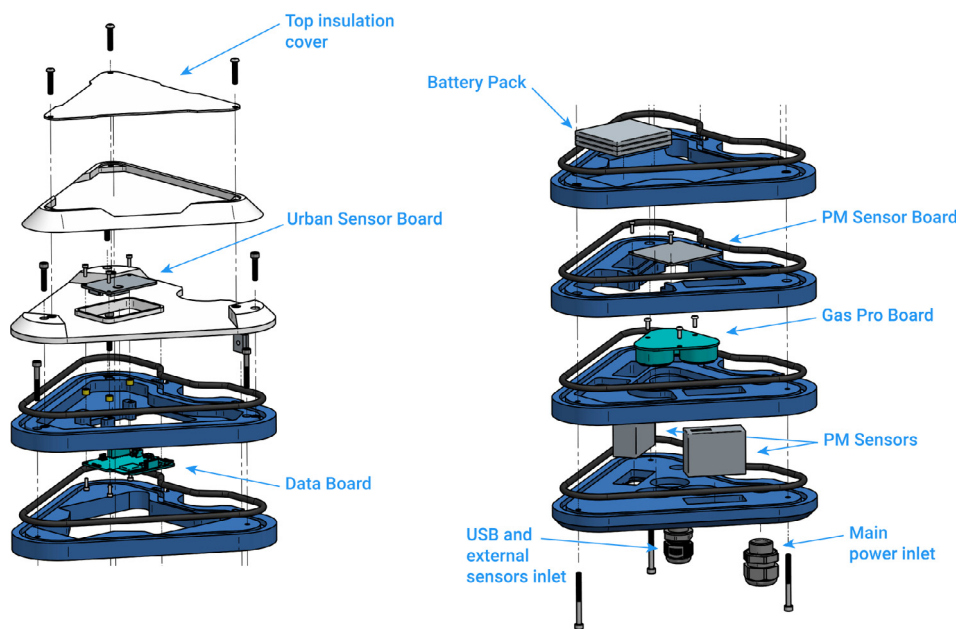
Smart Citizen Station V1.0: Exploded view.
